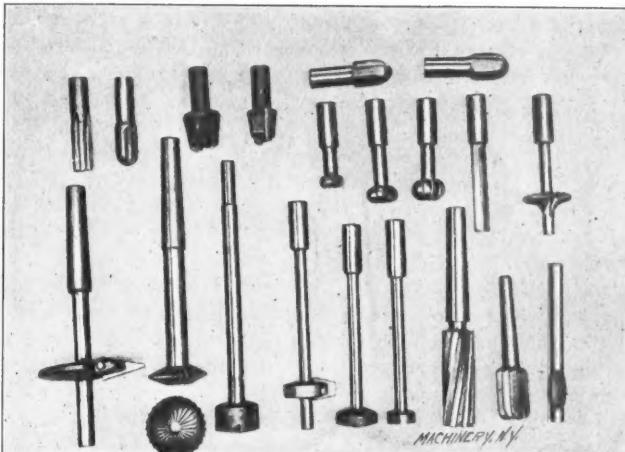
Milling Tools used in Die-sinking, with Examples of Fly Cutters.
